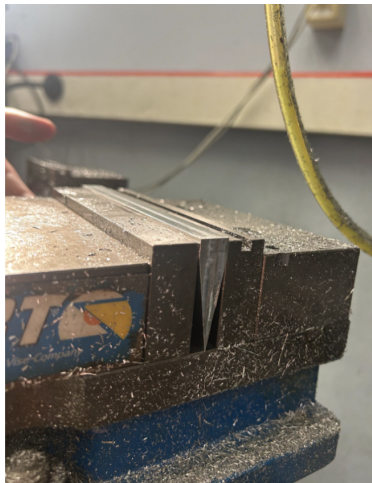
Slot cut setup. The slot is machined with a 1/4 in end mill and is used to interface the aluminum trailing edge with the carbon fiber fin.
